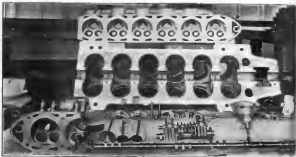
CRANK CASE AND CYLINDER PORTIONS OF THE KING 550 HP. AIRCRAFT ENGINE
